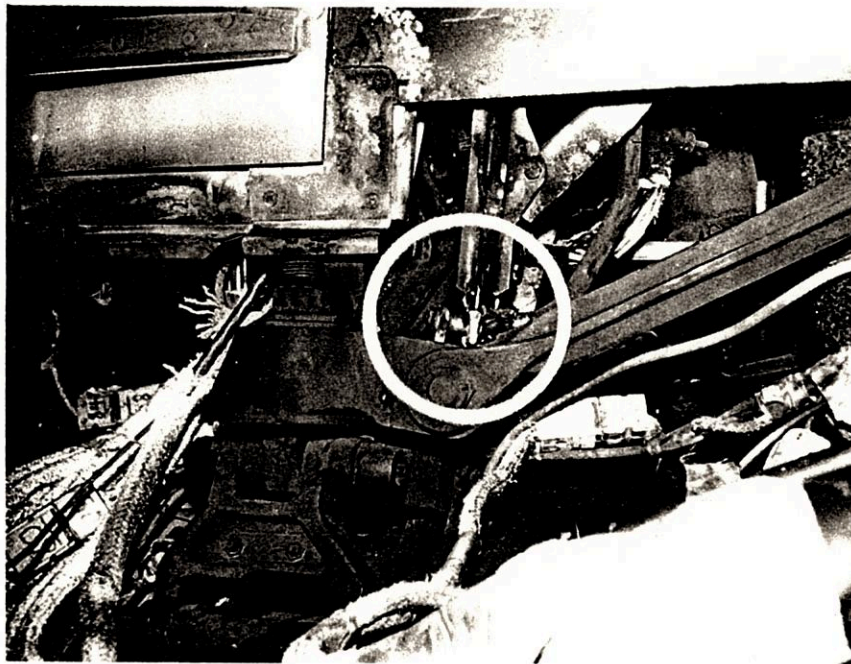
FAILED HINGE ATTACHMENT POINT
